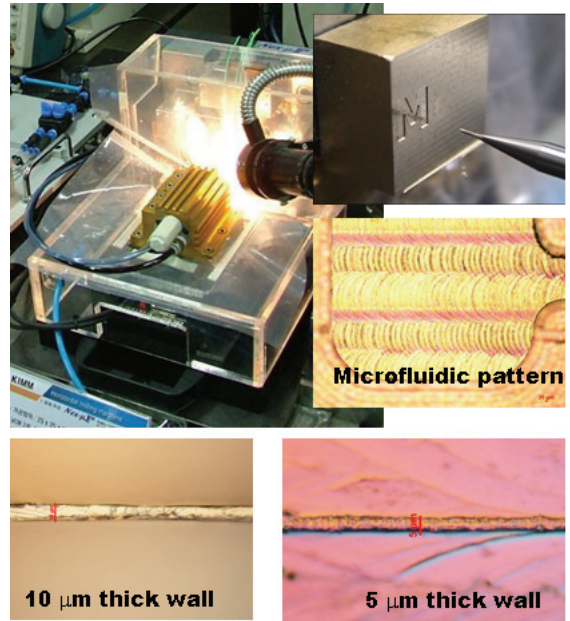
Experimental results from the NC system and a 3-axis desktop milling machine
